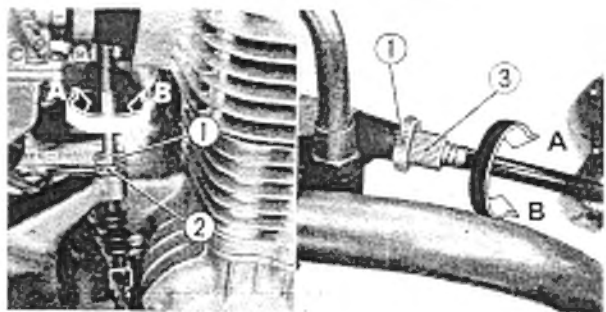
① Lock nut ② Clutch cable lower adjuster ③ Clutch cable upper adjuster
